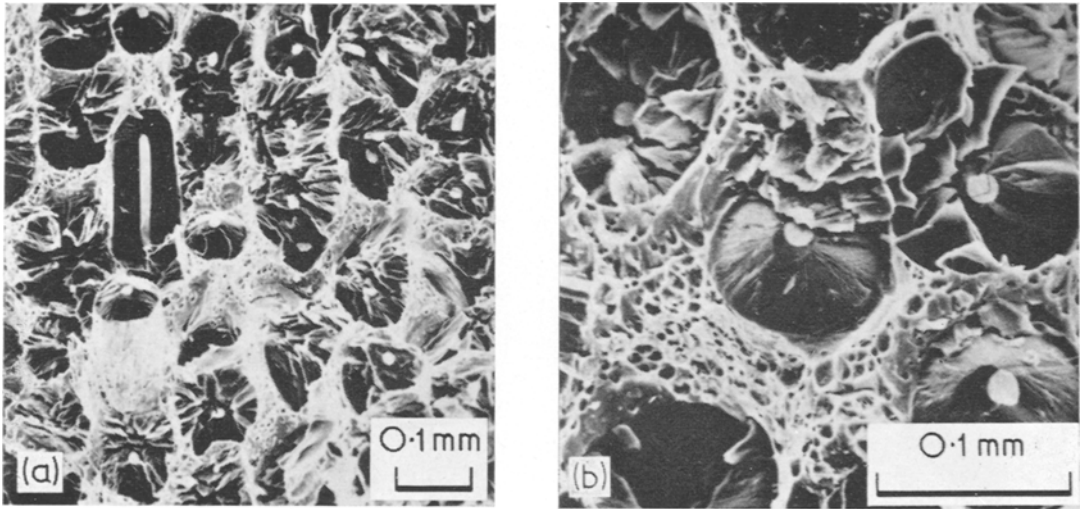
Flexural fracture surfaces. (a) as-received B-AI, (b) H/t B-AI.
